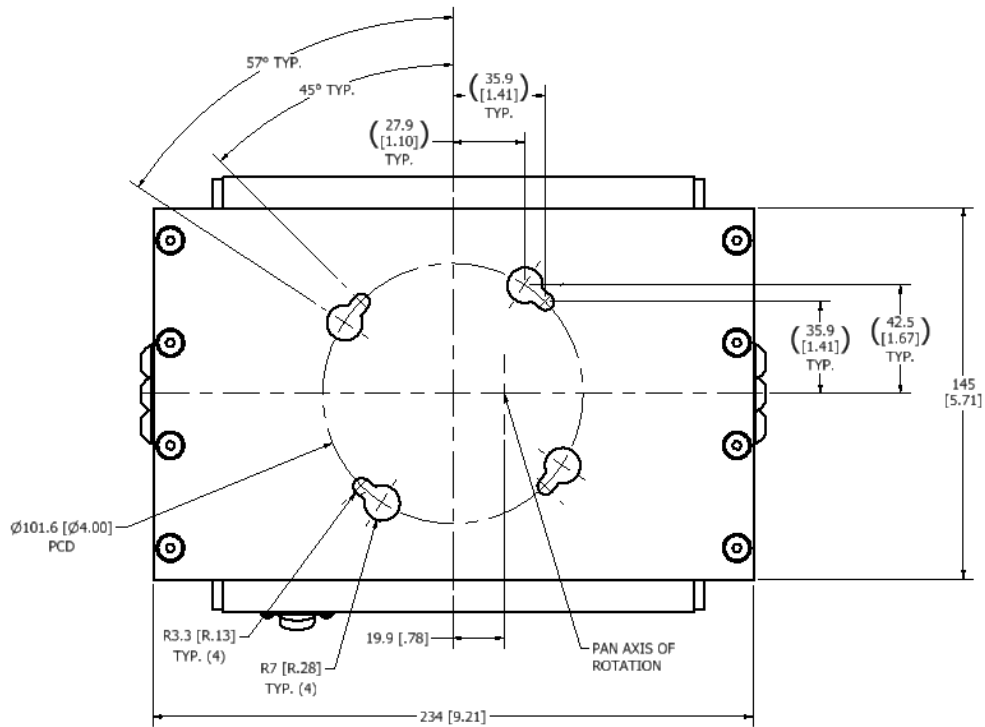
AP-50 OTT - Payload Mounting Pattern
